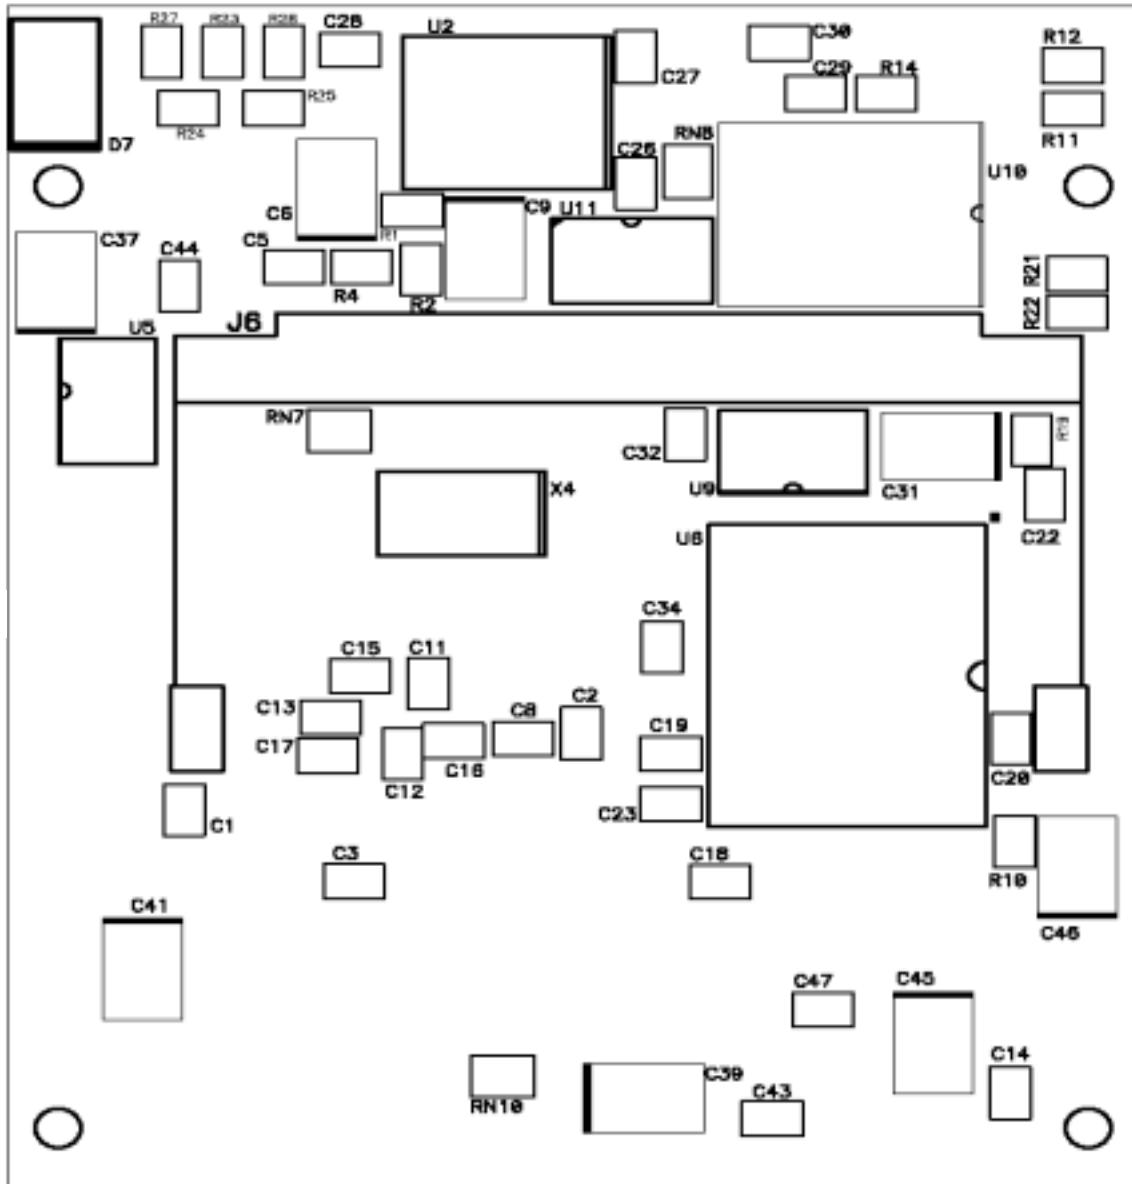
CerfBoard Bottom Side Parts Placement Diagram
